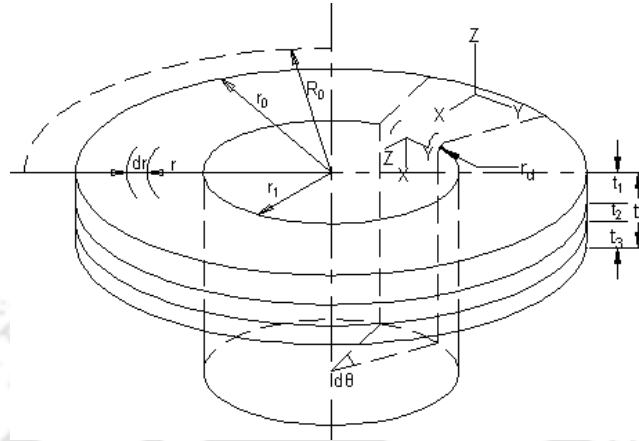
2 Schematic representation of cup drawing of adhesive bonded blanks
